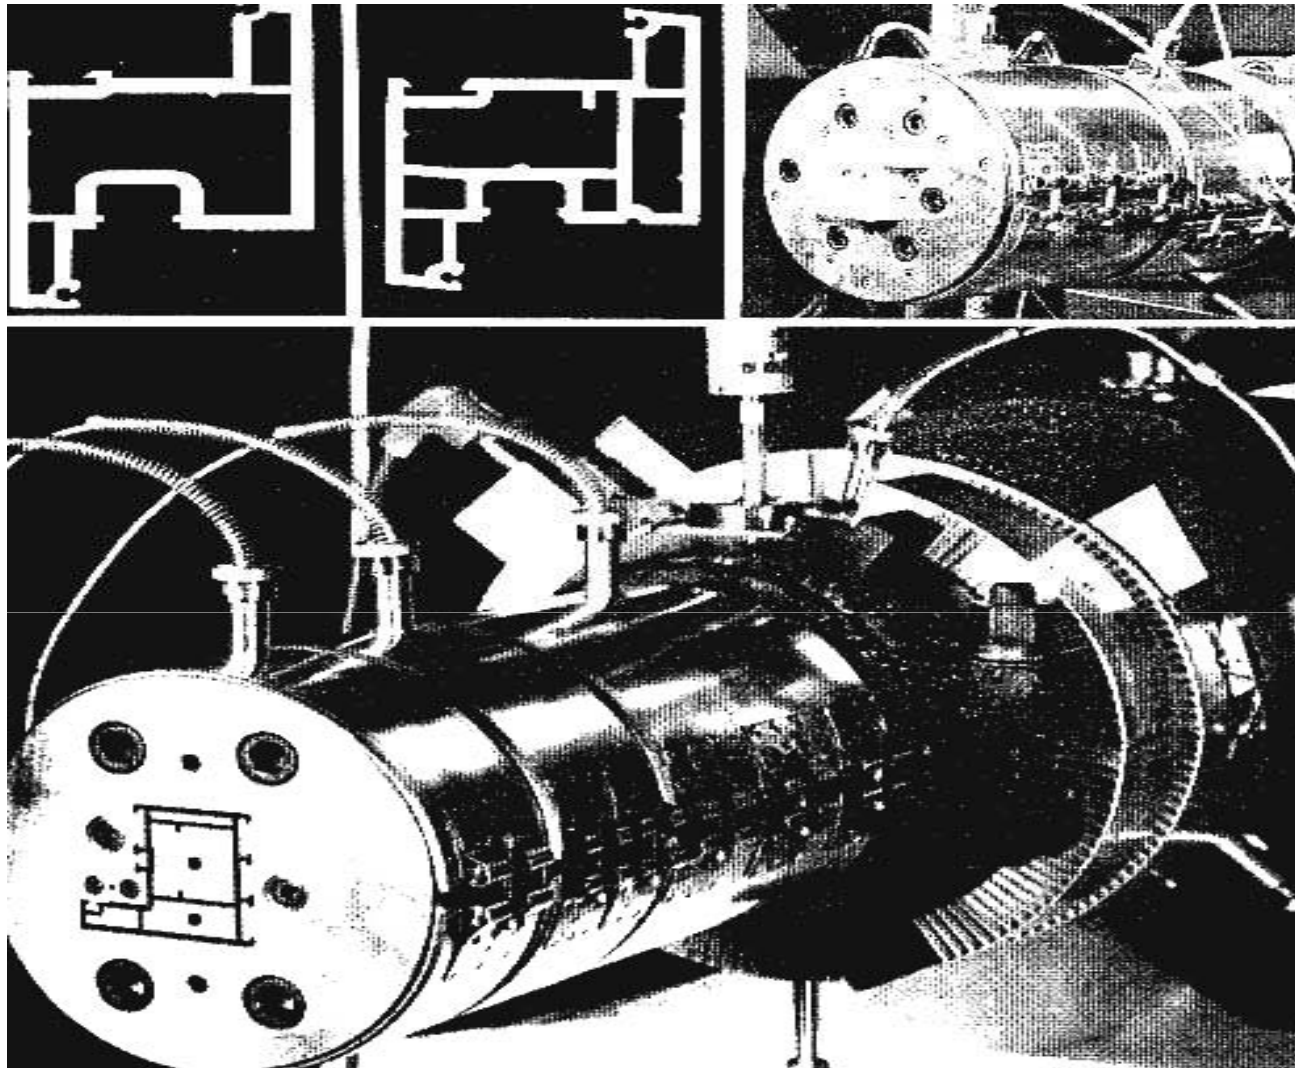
Examples of PVC cross sections for window frame fabricating.
